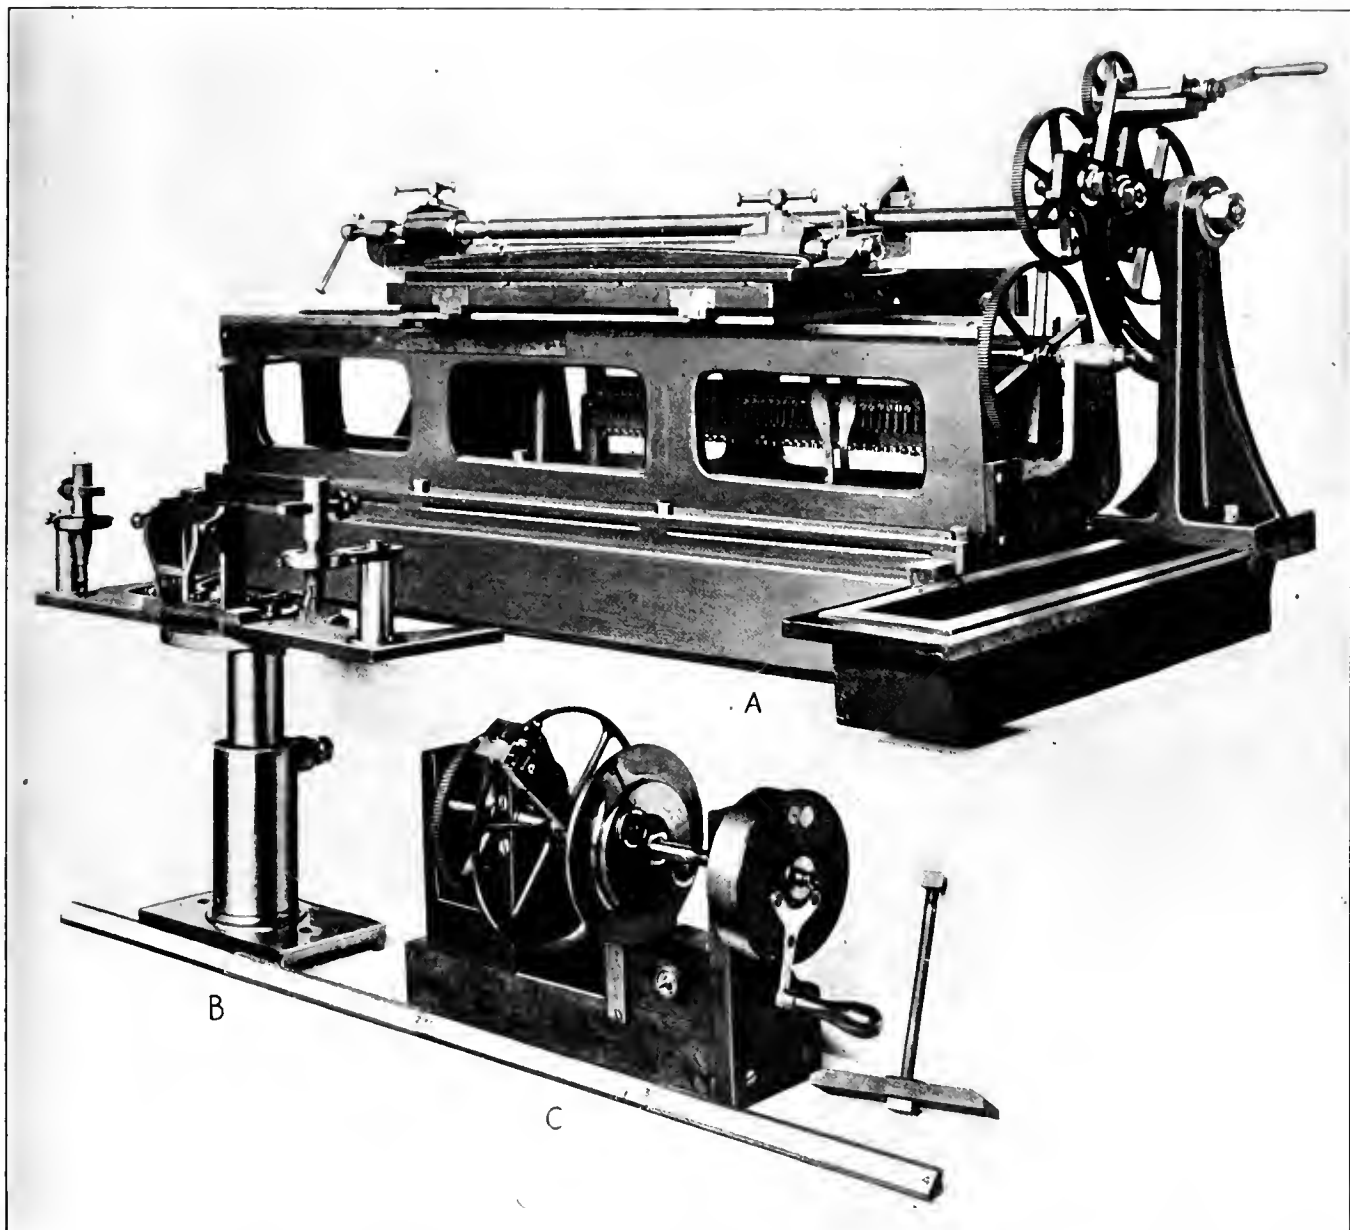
Donkin's Dividing Engine and Accurate Screw Cutting Lathe. A Compensating Device is provided for Correcting Local Inaccuracies of Lead screw
